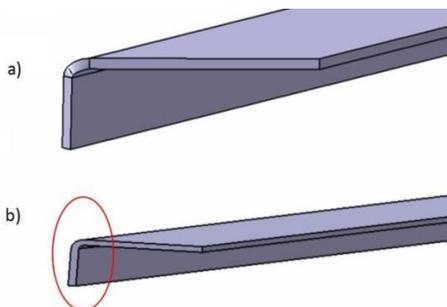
Edges (surface) obtained using the same tool: a) in the module for sheet metal; b) in a module which is not intended for sheet metal
